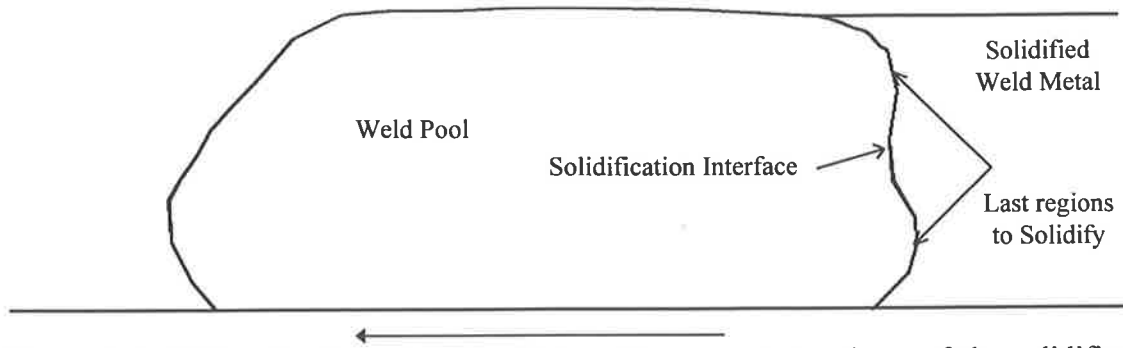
Schematic of the model of the weld pool and the shape of the solidification interface. The arrow shows the direction of welding.
